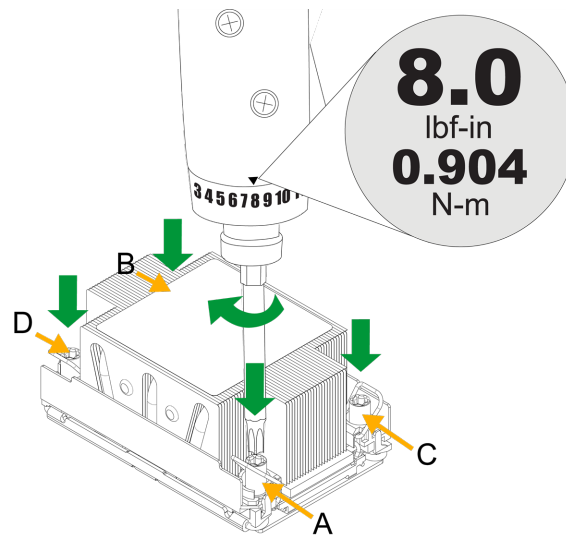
Installing the PHM with a Torque Driver (1.5U)
